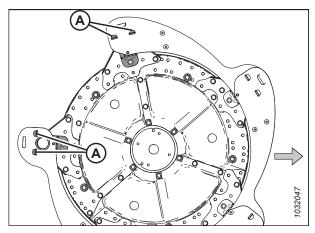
Reel Endshield Removed – Inboard Cam End
